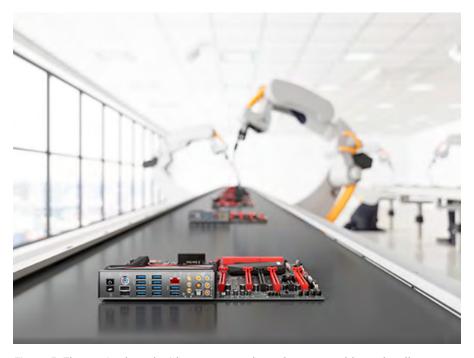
Electronics boards ride a conveyor through an assembly work cell. (Image source: Getty Images)
